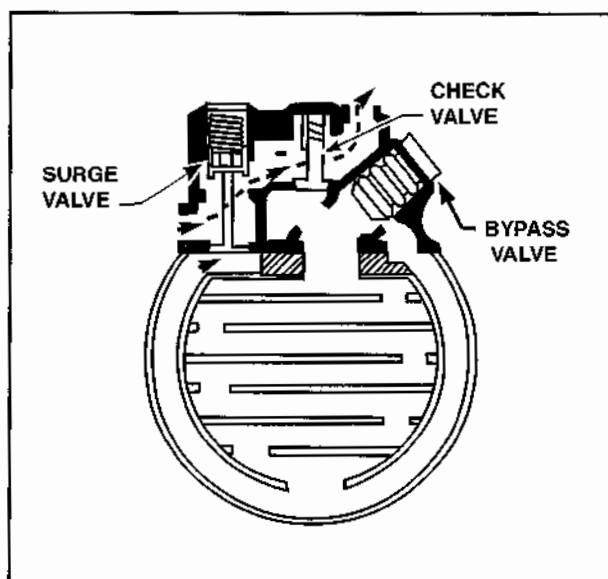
If the oil in an oil cooler congeals and excessive oil pressure builds at the oil cooler inlet, a surge valve opens and permits oil to bypass the oil cooler.
